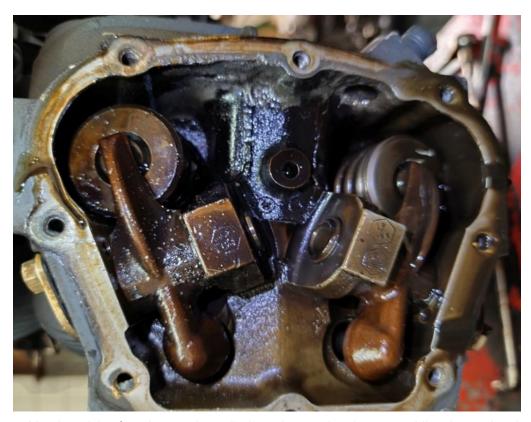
Metal particles found on engine cylinder valves and rocker assemblies due to the circulated contaminated oil.
